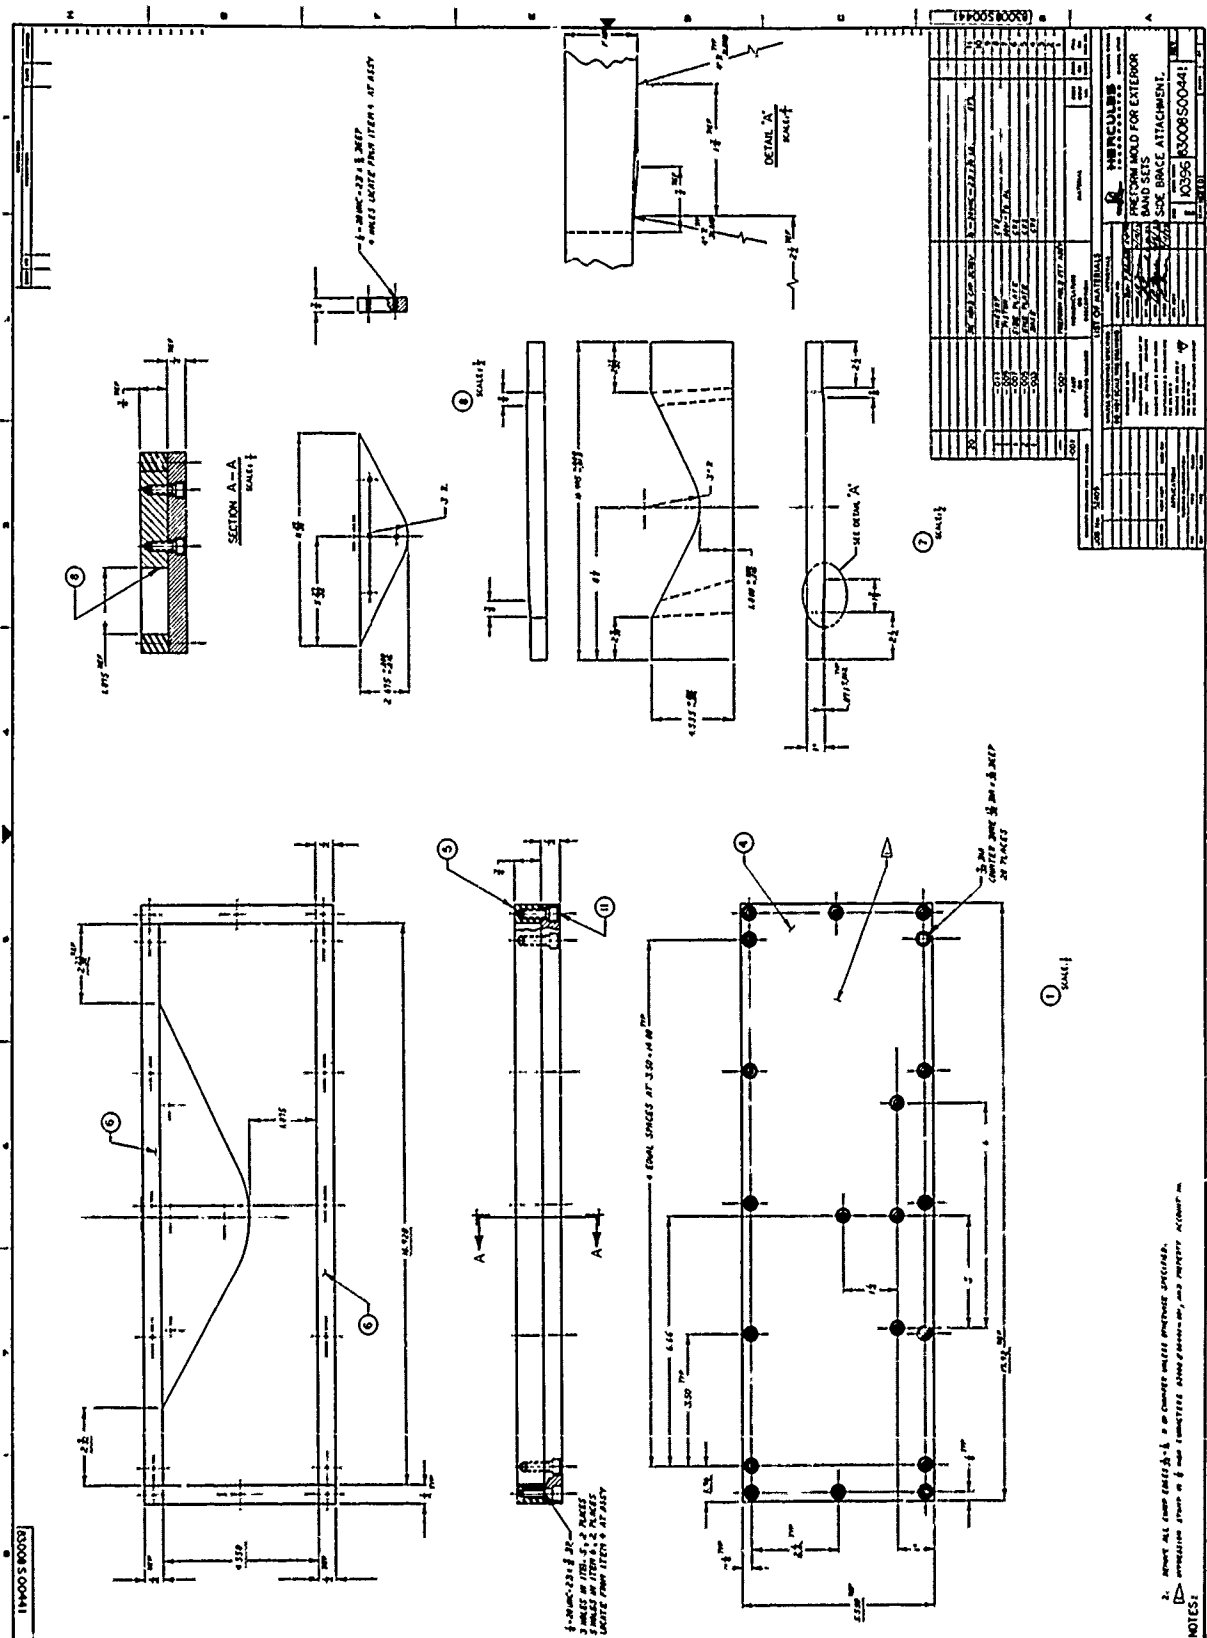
Exterior Band Set Mold, Side Brace Attachment, Drawing 93008S00441
